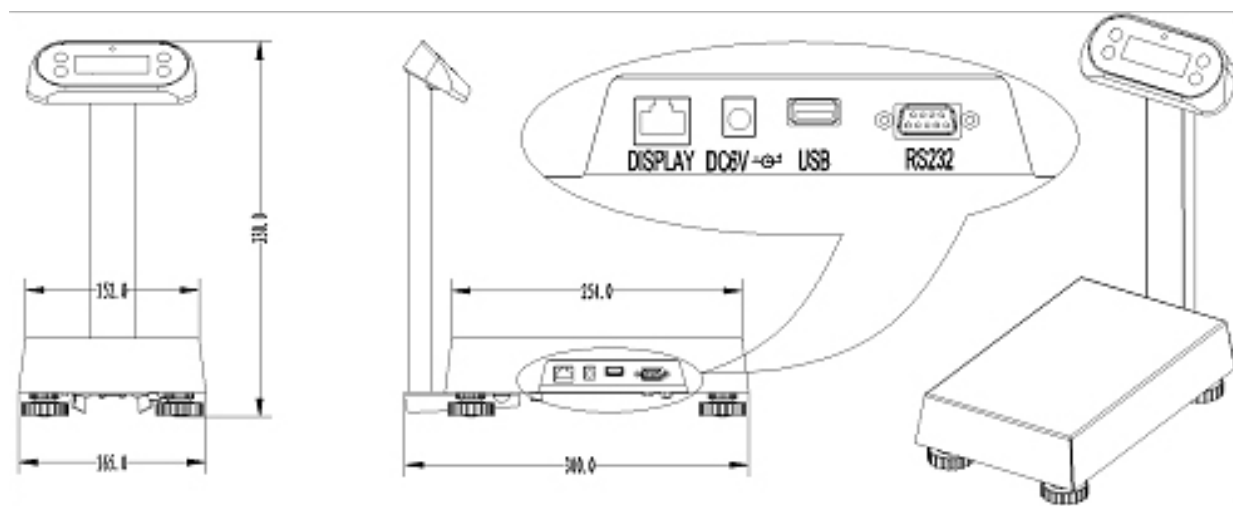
67XXU Dimension Drawing with Indicator on a Column
